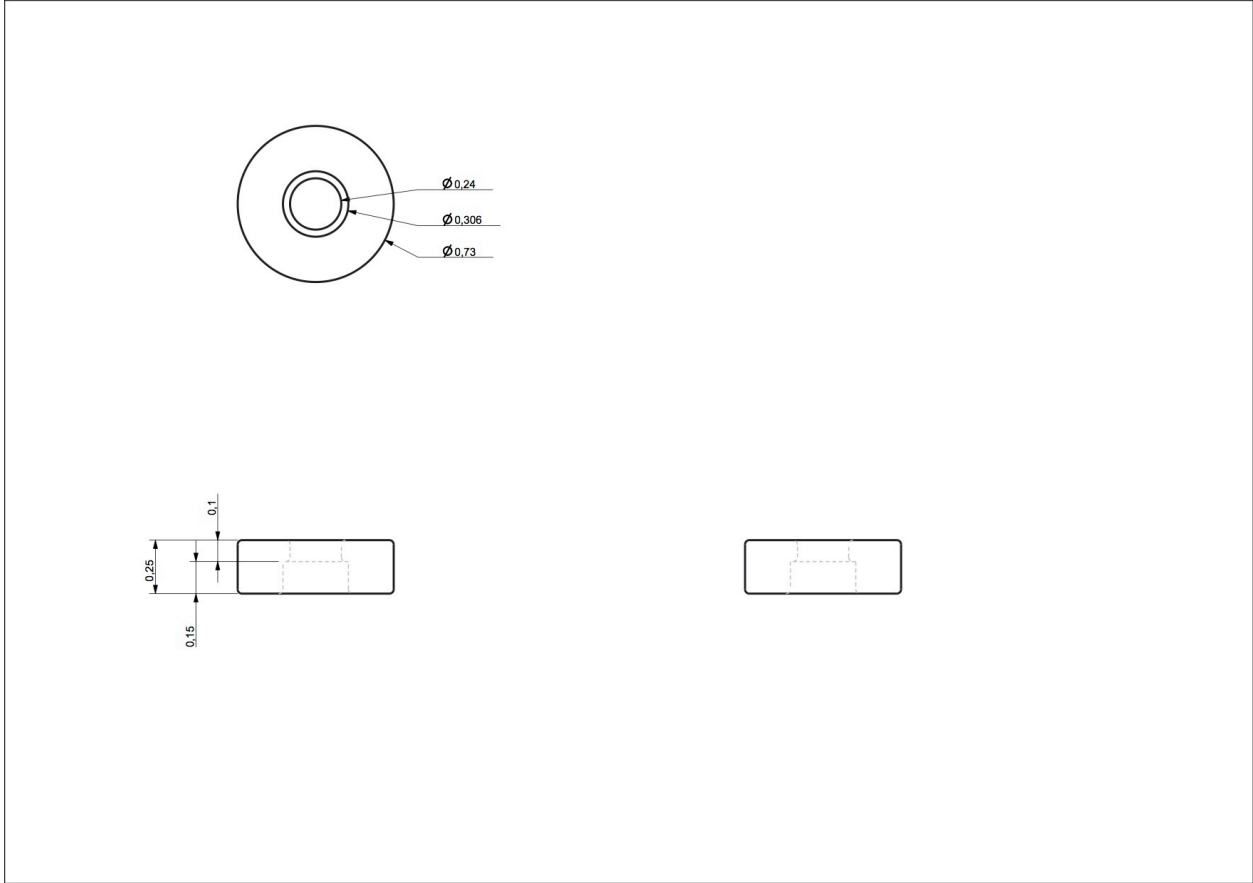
Item 27 – Ceramic eyelet holder (Inches)
